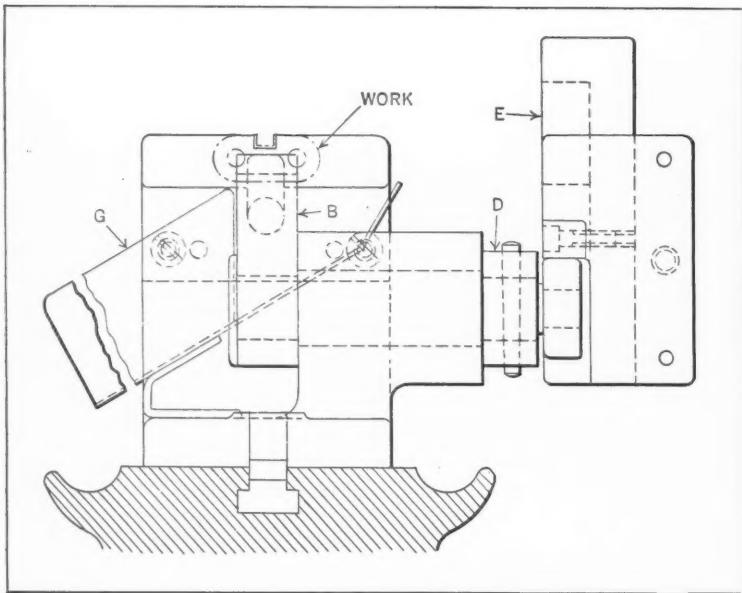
End View of the Fixture Illustrated in Fig. 1, Showing the Work in its Clamped Position
